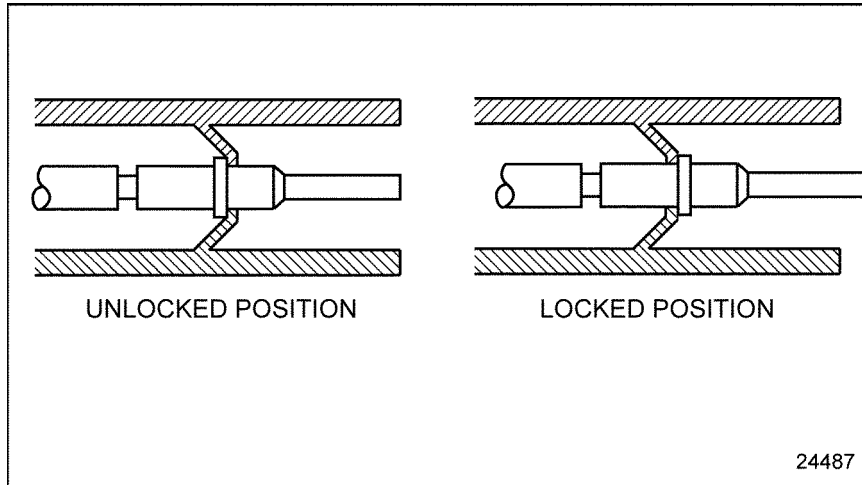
Setting Wire Gage Selector and Positioning the Contact
